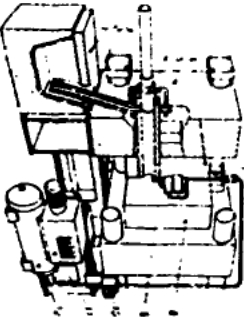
Layout of the VAW-Wingarten 'Vavac' pressure die casting machine.
